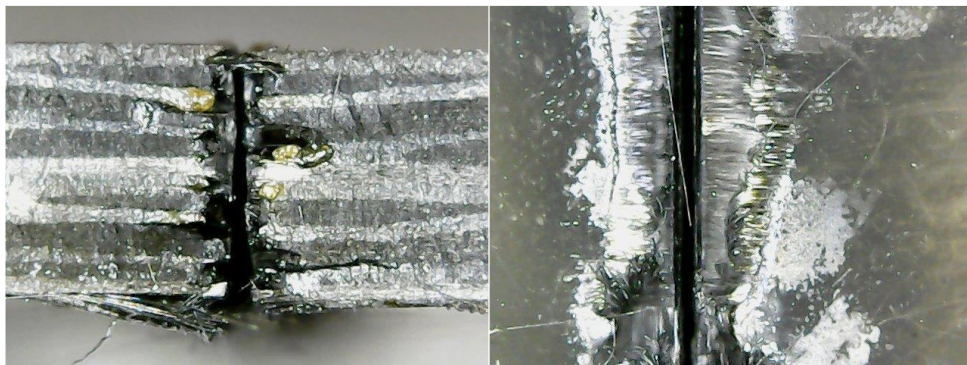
Microscope images of edge side (left) and top side (right) of laser cutting test 73.
